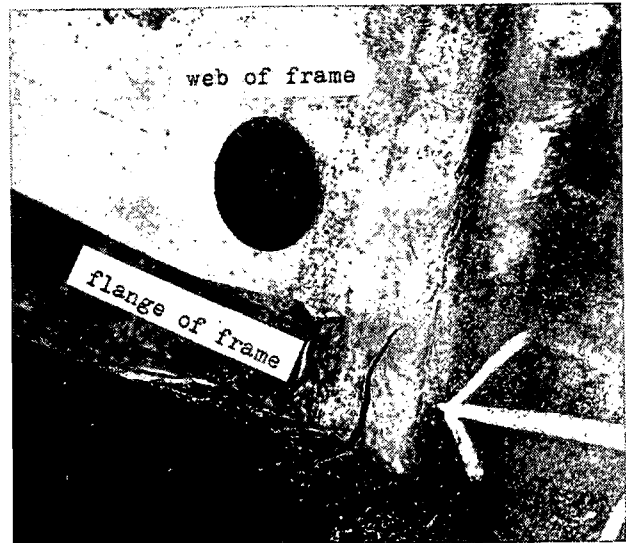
Tiny crack in end-weld connecting frame to deck (dynamic compression; point E of no. 46)
